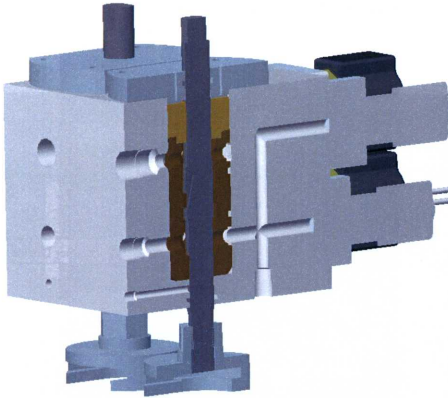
3D cross sectional view of the electro-hydraulic valve actuator
